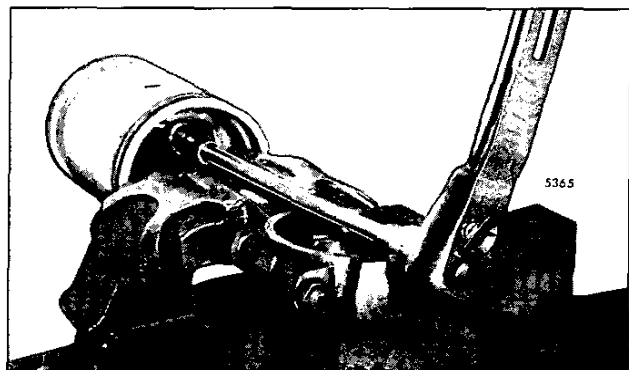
Tightening Connecting Rod to Piston Pin Bolts
